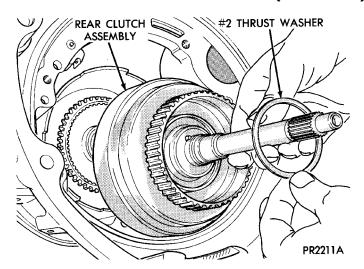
No. 2 Thrust Washer and Rear Clutch
